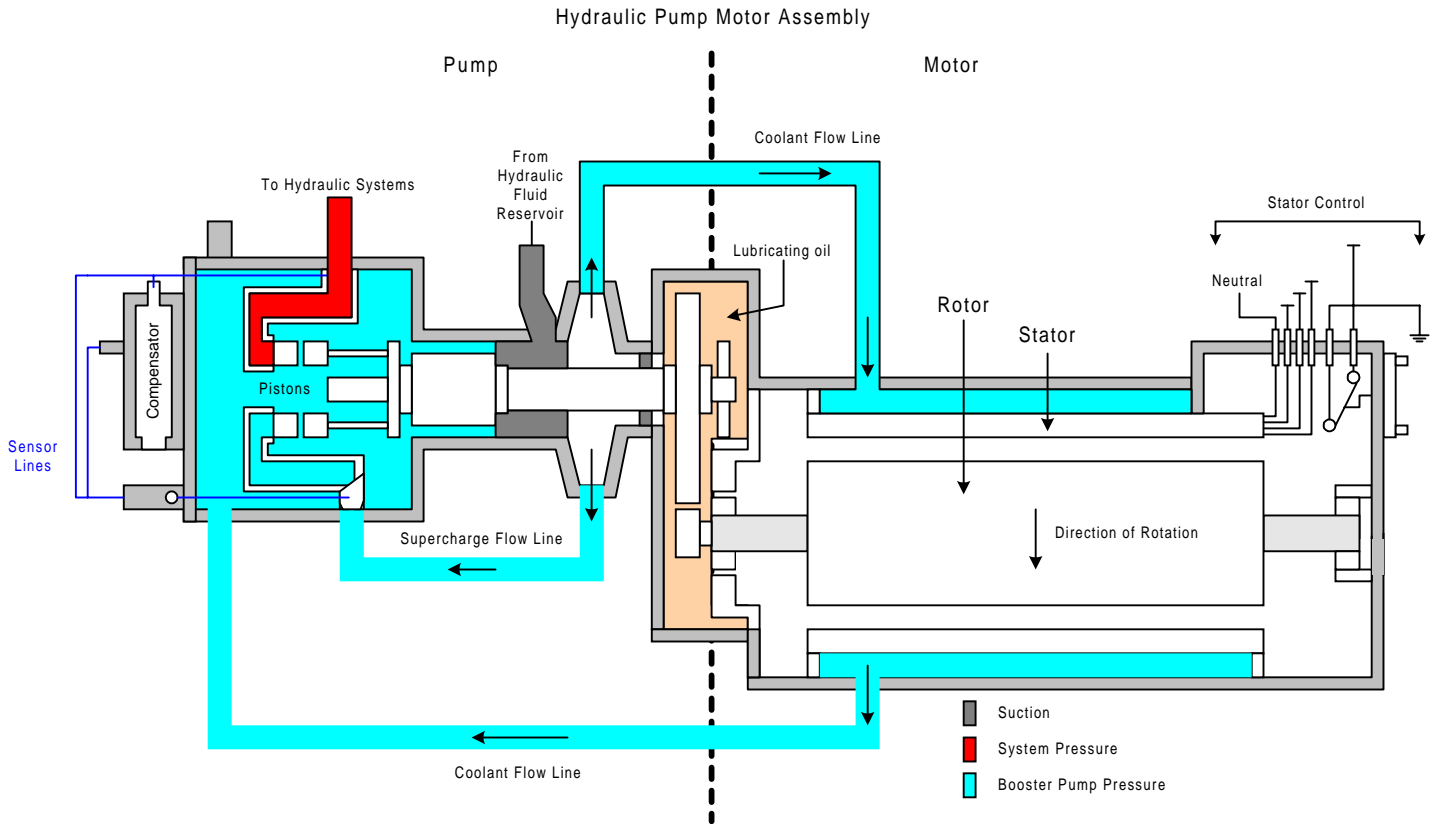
Parts of a Hydraulic Pump Motor Assembly
